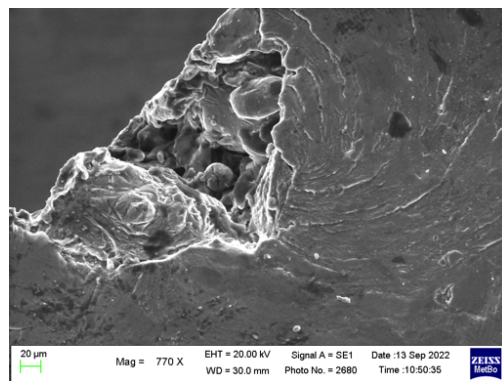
Fatigue crack origin on the surface of a shot-peened specimen.
